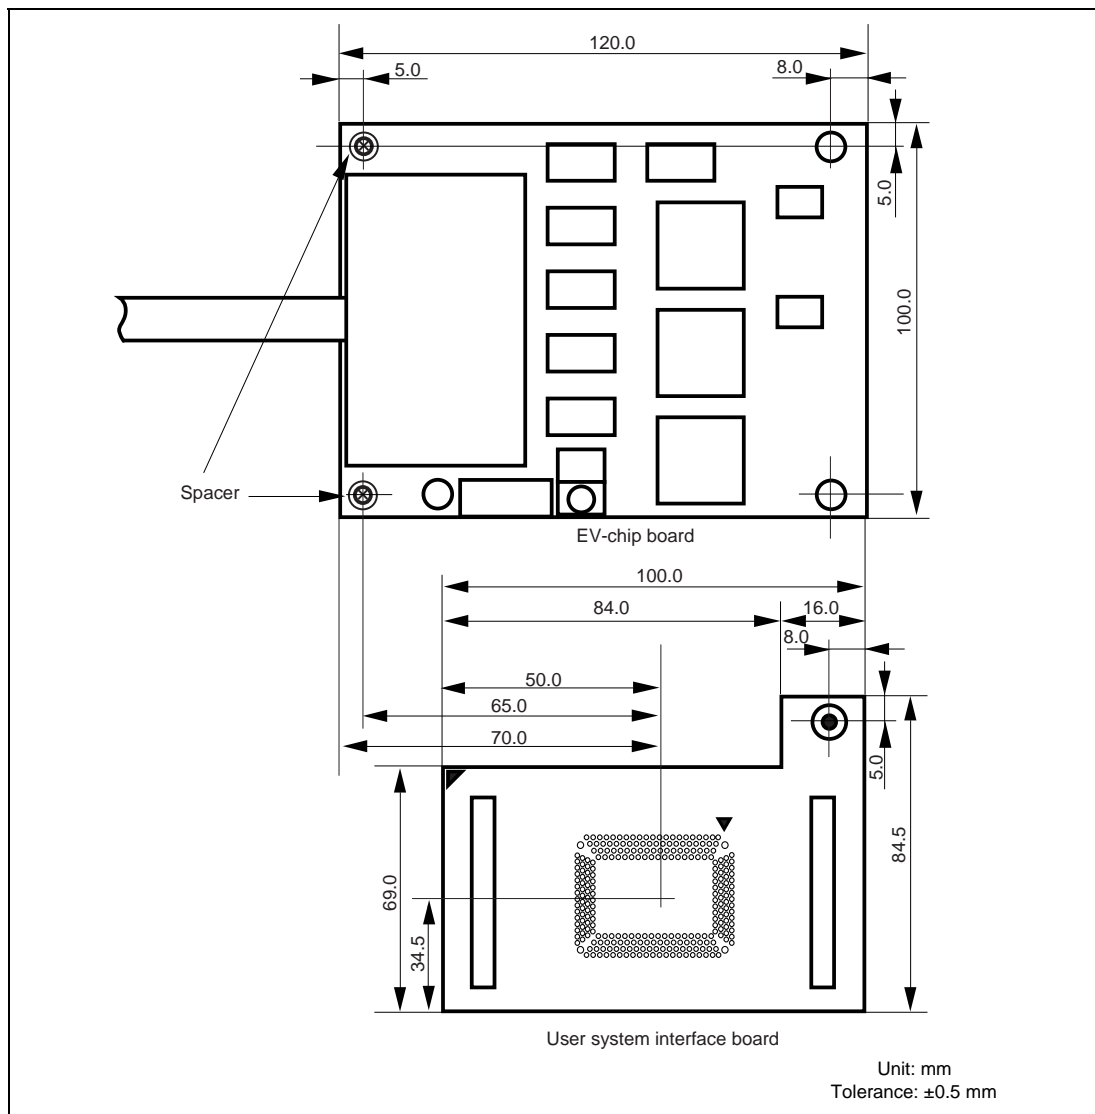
Dimensions for EV-Chip Board and User System Interface Board
